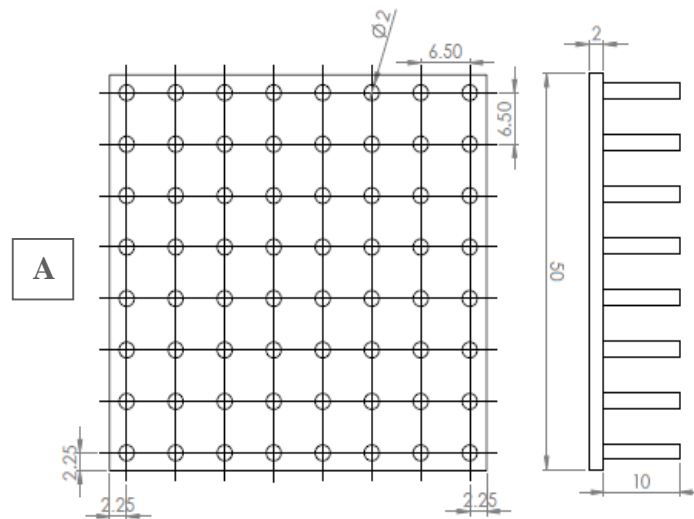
(A) Plan view and (B) Side view of the pin fin heat sink being analysed
